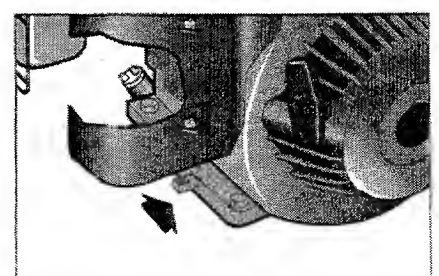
Oil drain plug on 8HP IP Briggs & Stratton engine.
